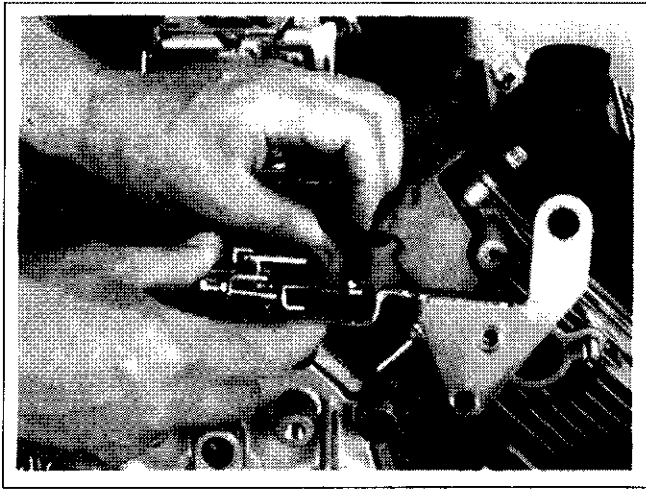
Disconnecting Choke Linkage from Actuator Lever.
